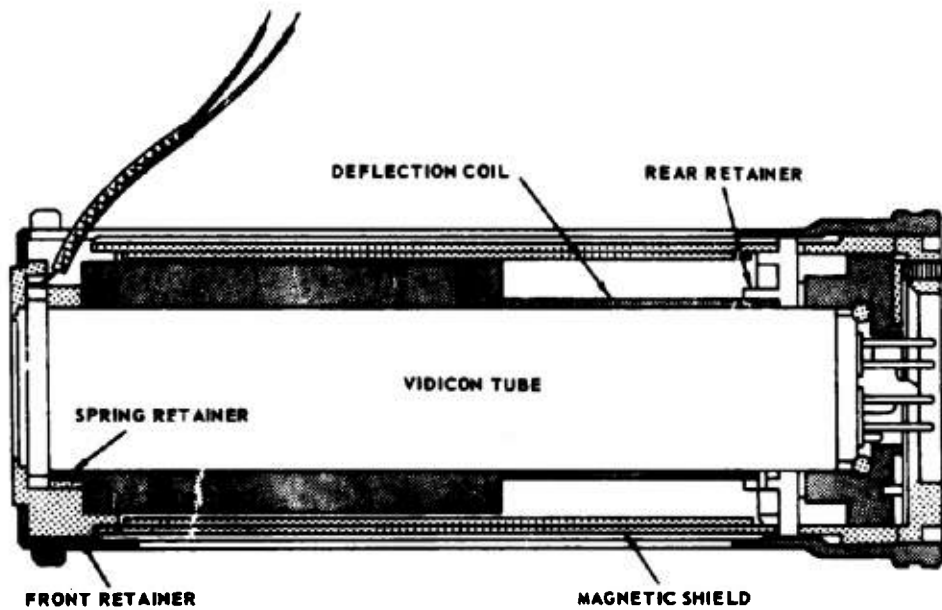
VIDICON TUBE ASSEMBLY, 22° AND 60° CAMERA
